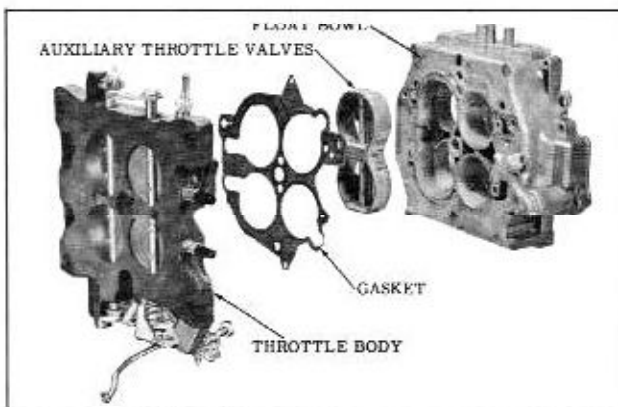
Throttle Body and Auxiliary Throttle Valves
